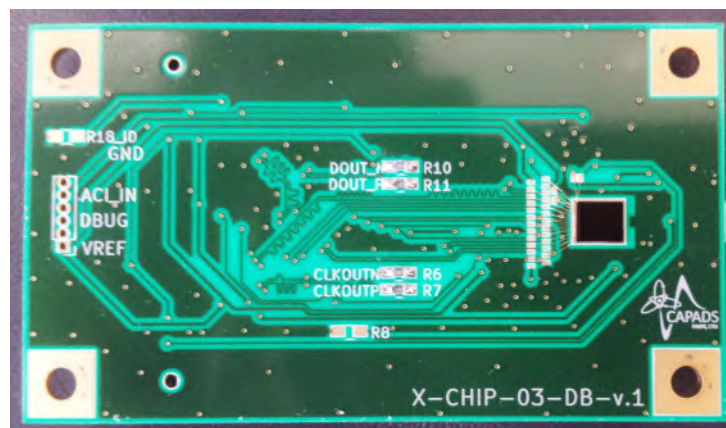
The CHIP-03 PCB daughter board with respect to lines impedance.
